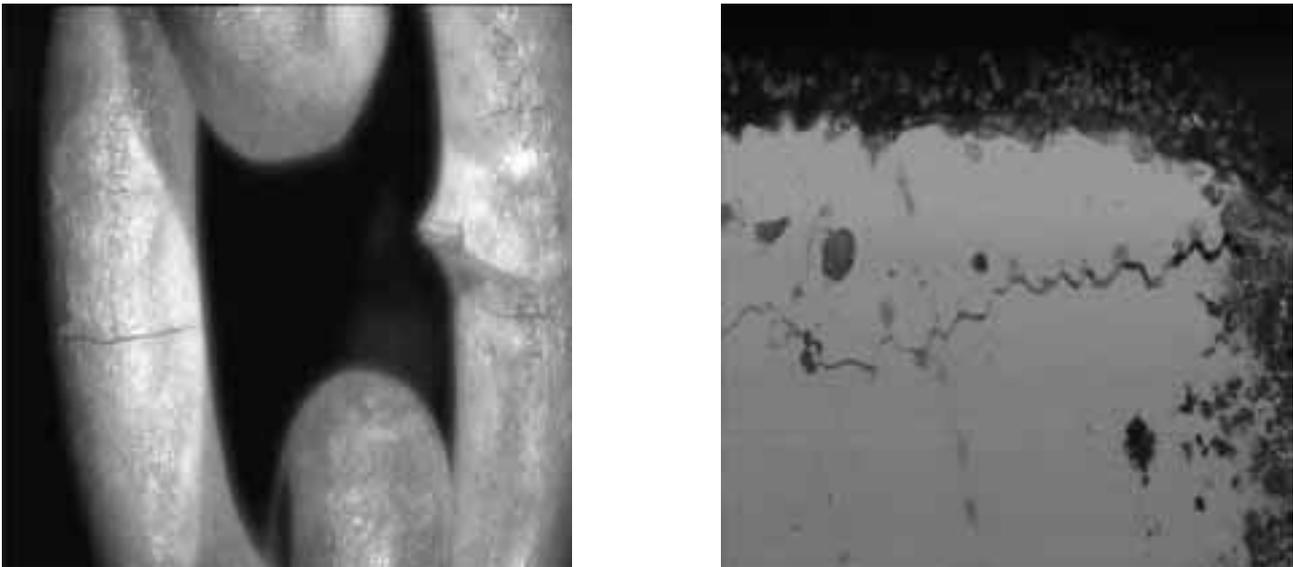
Caustic embrittlement of a chain, several cracks are evident. The higher magnification shows the fracture area and a crack, intergranular in nature, is evident close to that fracture surface.
